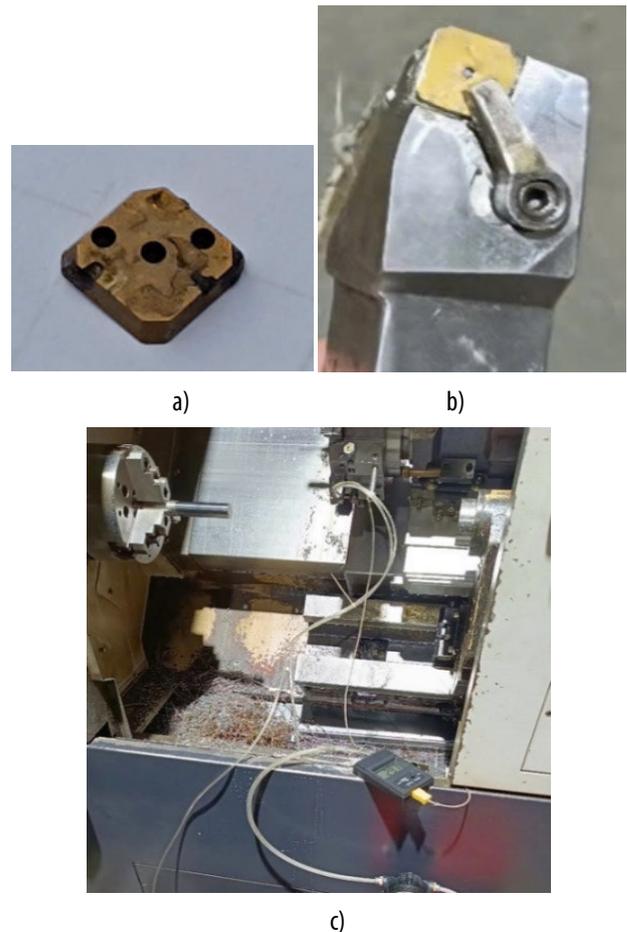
a- ICTT insert, b- ICTT insert and tool holder, c- Trial machining of SUS201 steel using ICTT
